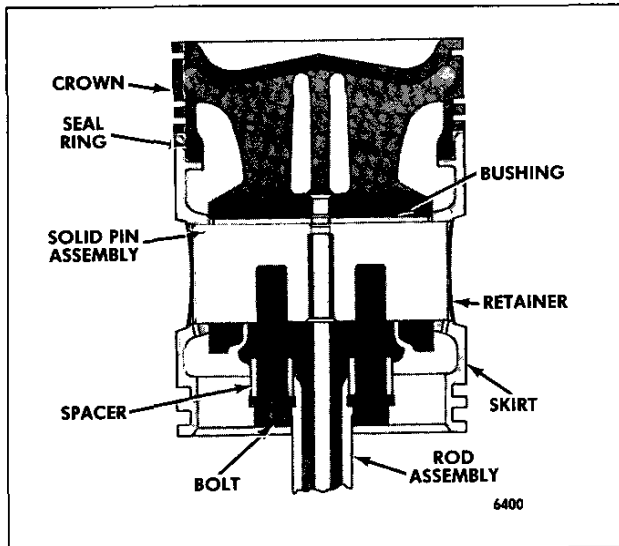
Cross-Head Piston and Connecting Rod Assembly
